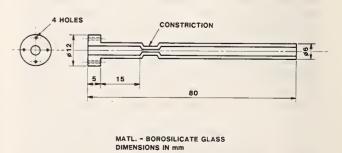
Header cap. The header cap is inserted into the large end of the header body and sealed with epoxy. Thermometer leads exit through the four holes. The tube is used for evacuating, filling, and sealing the thermometer.
